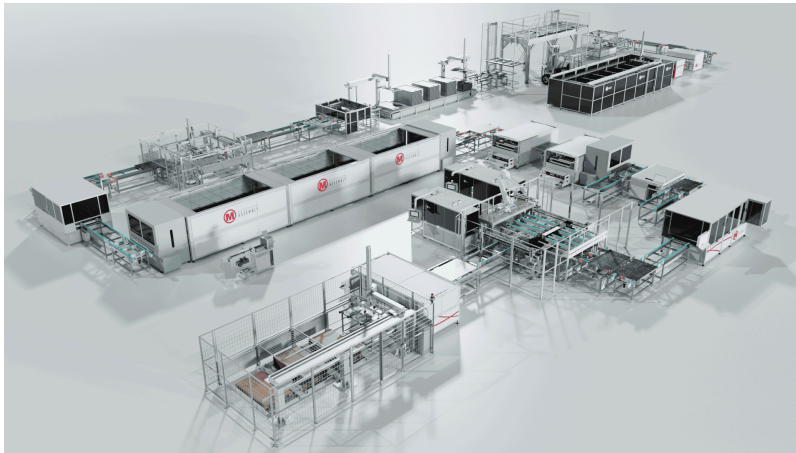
Real-World Automobile Assembly Industry Applications
